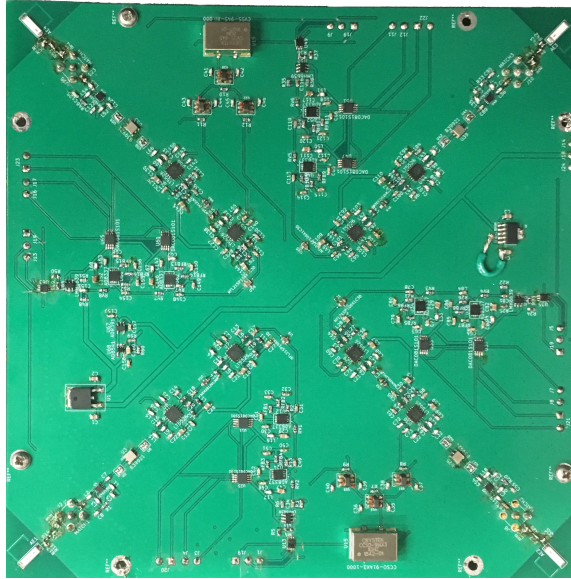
RF-frontend PCB with four receiver chains fully soldered.
